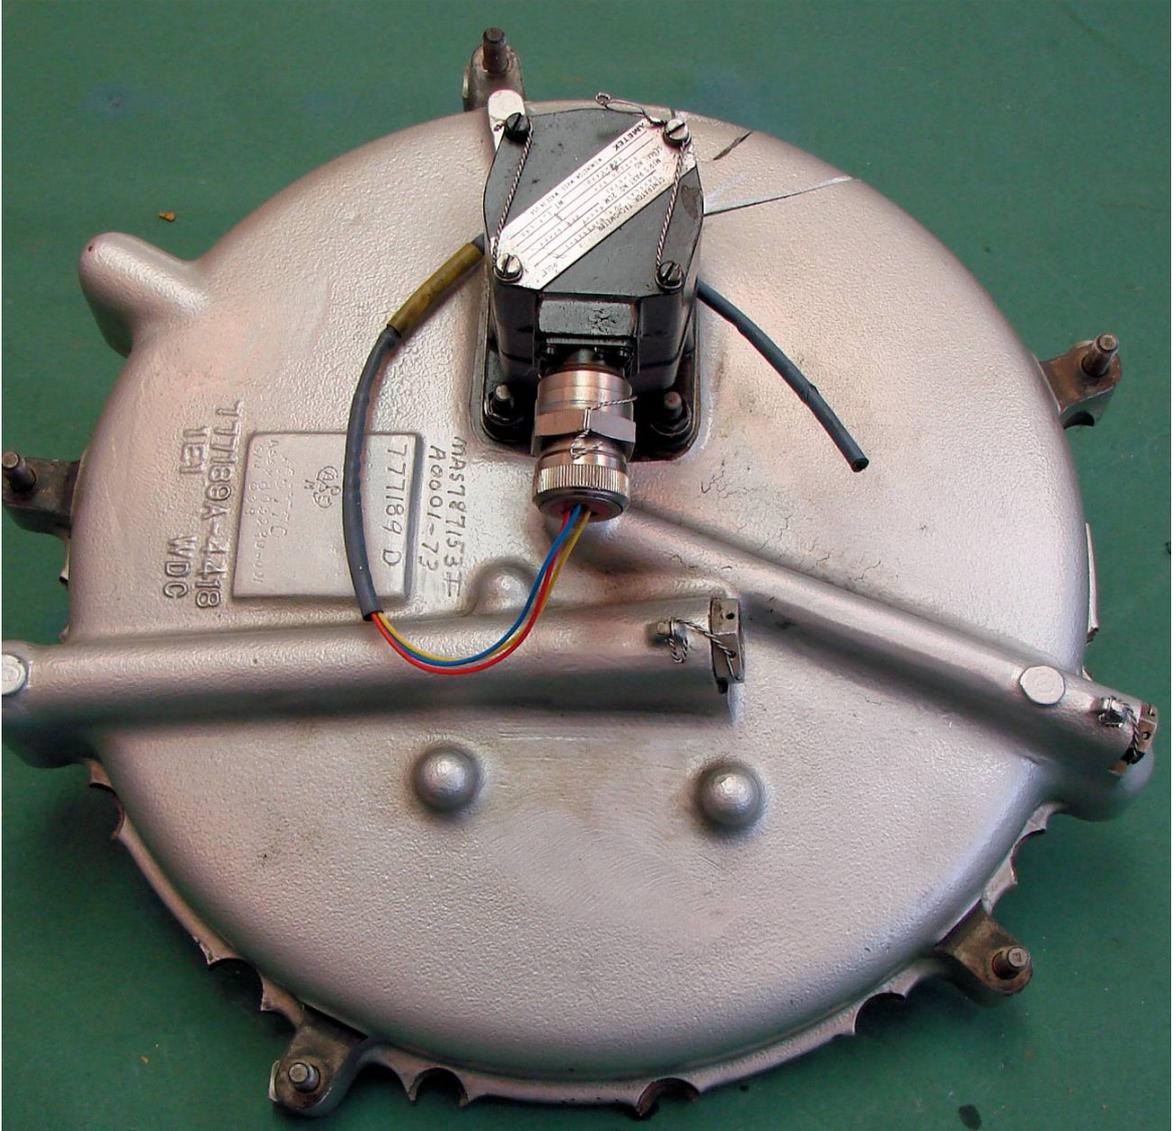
View of FAD support assembly looking aft relative to flight direction.
